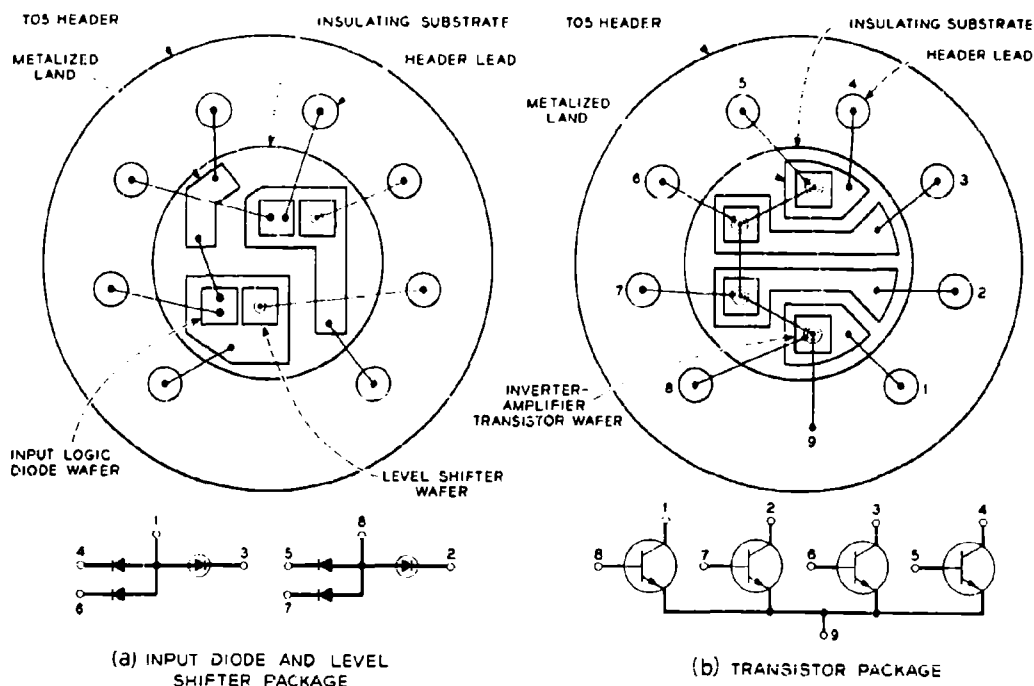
Package design for layout with external resistors. (a) Input diode and level-shifter package. (b) Transistor package.
